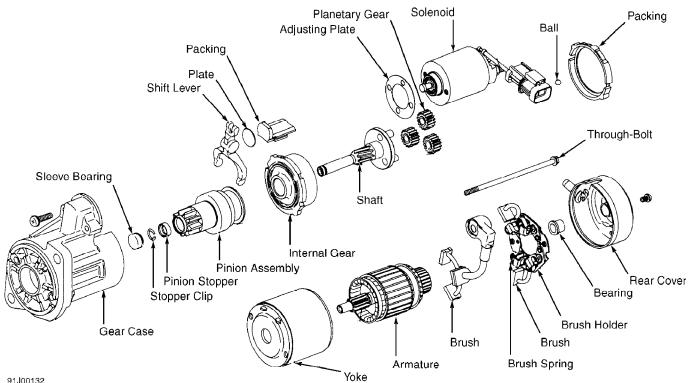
Exploded View of Starter S114-519A Courtesy of Nissan Motor Co., U.S.A.
